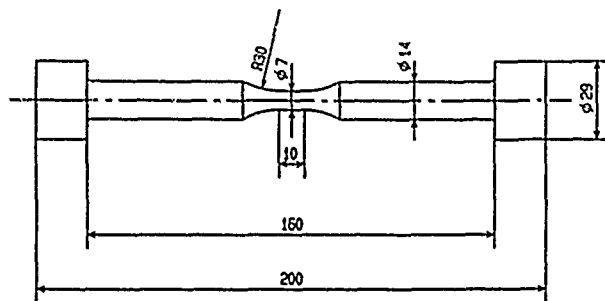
Shape and dimensions of test specimens. All dimensions are in mm.
